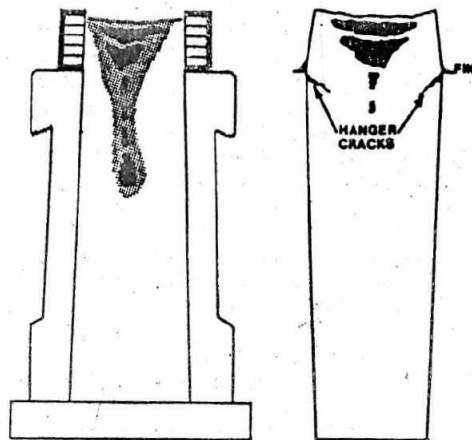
Use of traditional feeder heads illustrating hanger crack problem
